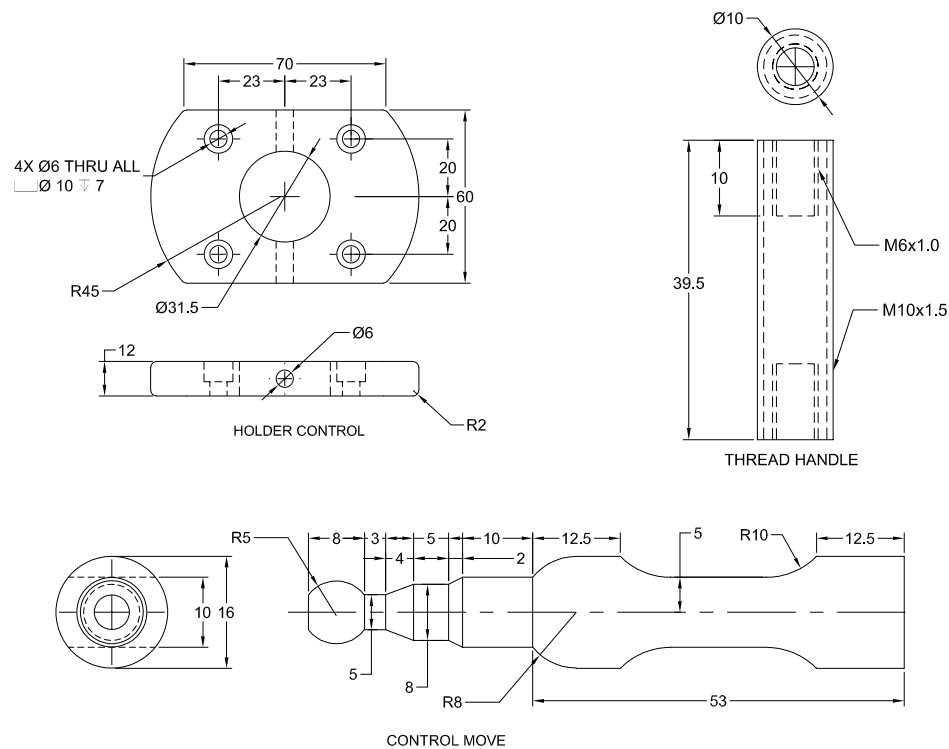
Dimensions of the Holder Control, Thread Handle, Control Move
